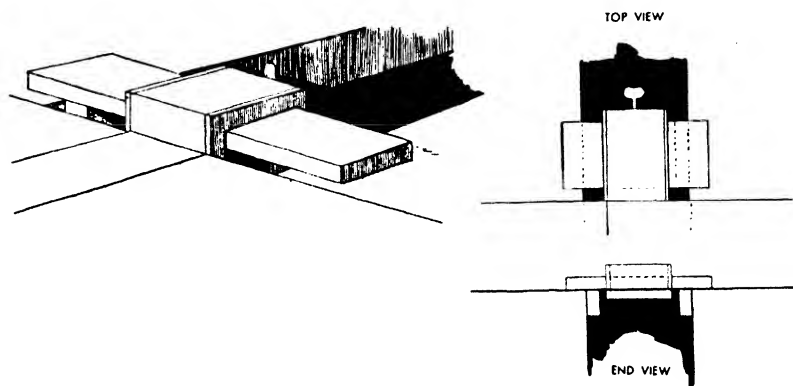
Alignment Fixture for Spot Welding.
